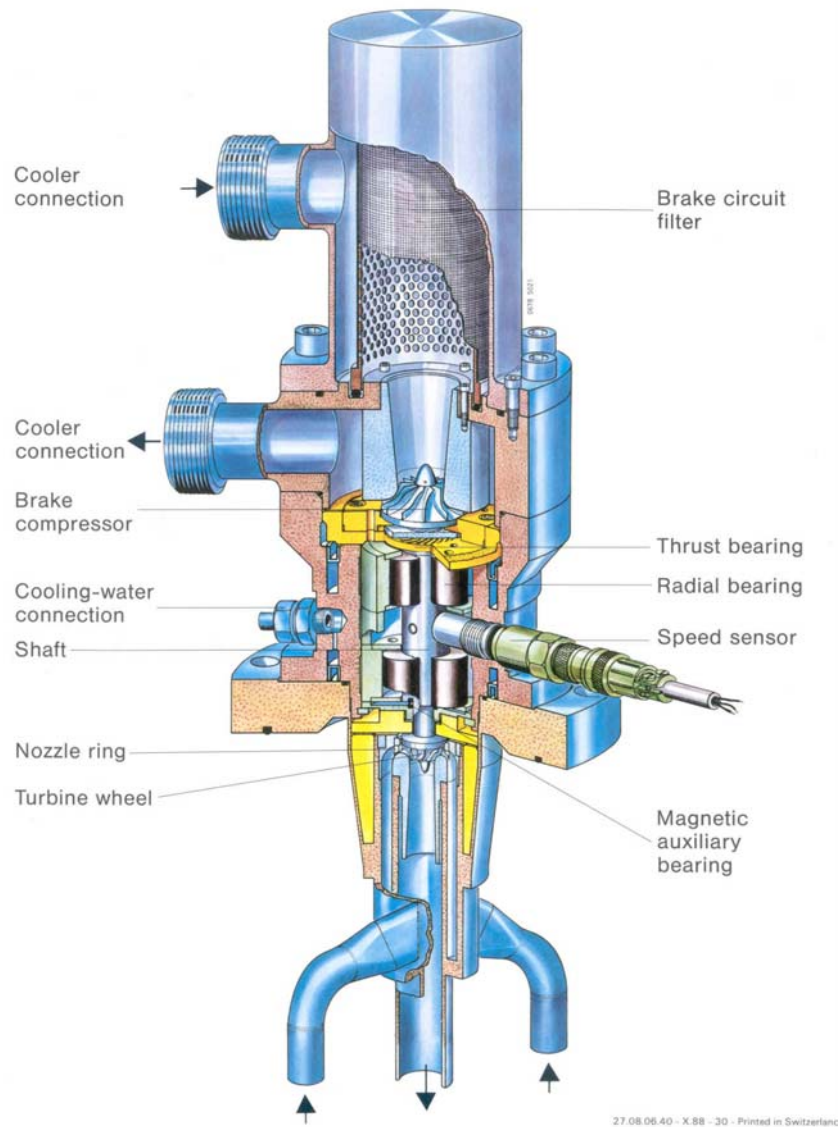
Dynamic gas bearing turbine (courtesy of Linde Kryotechnik AG)
